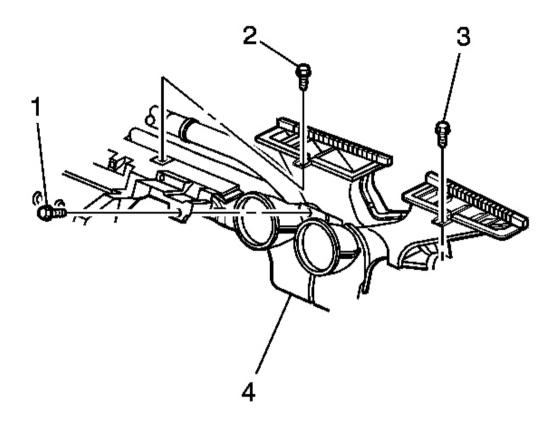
Screw & Air Distribution Duct Courtesy of GENERAL MOTORS CORP.
